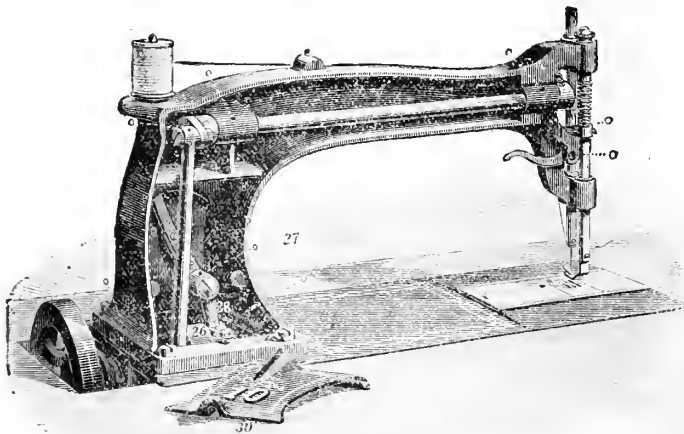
NEW NO. 10 MACHINE ARM CAP REMOVED.
